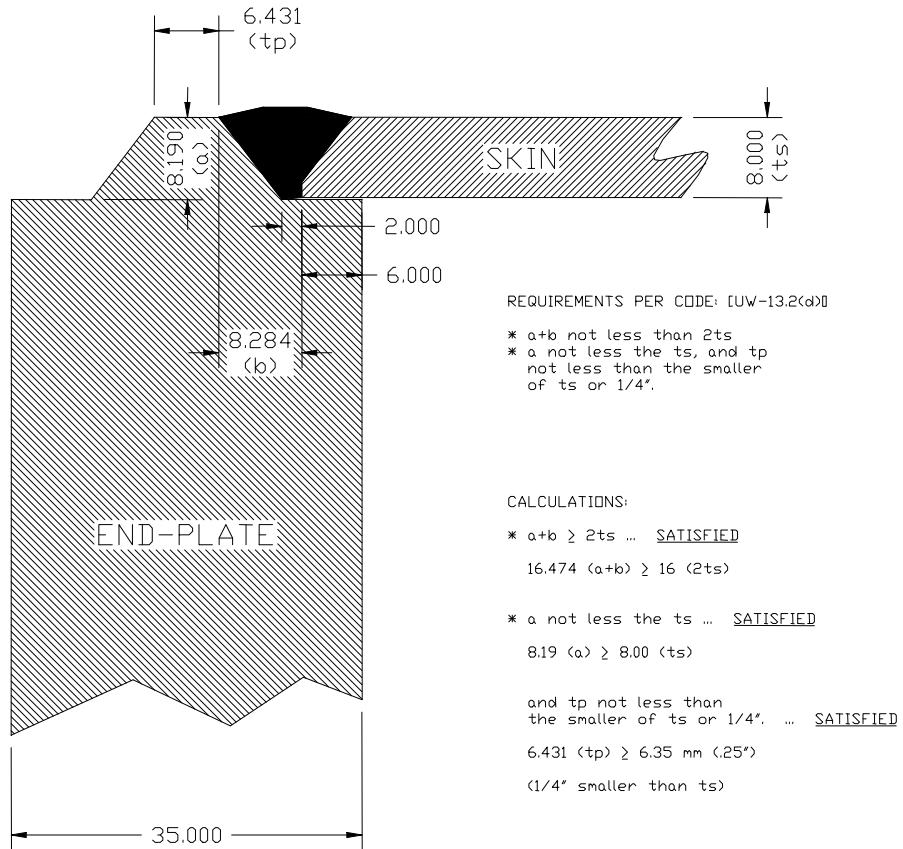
Detail of cold mass skin to end plate weld.
